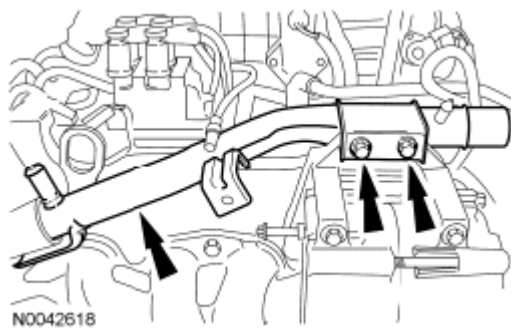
Locating Front Coolant Outlet Pipe And Bolts
